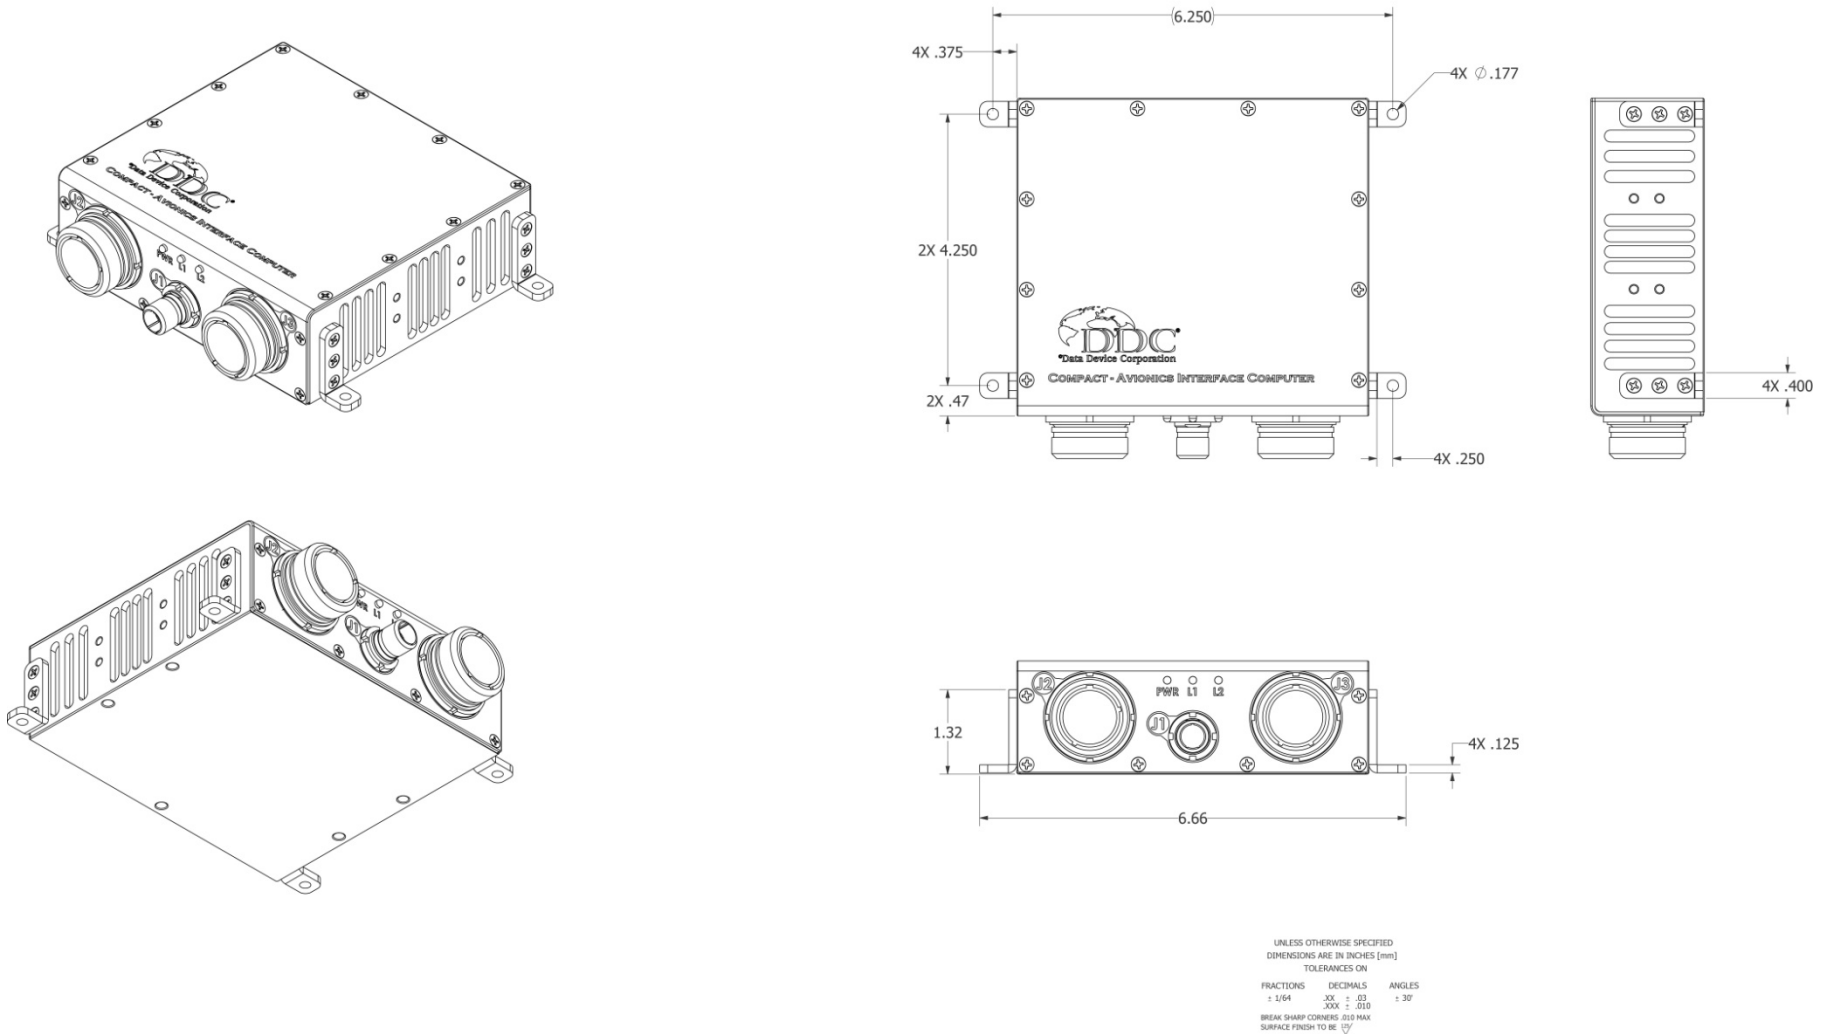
BU-67125Wx Mechanical Outline with Mounting options
